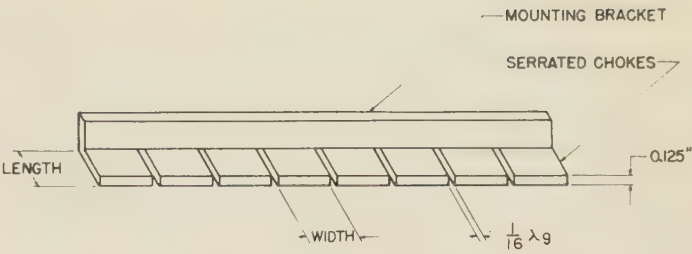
Rectangular cross section choke which was mounted on fixture in Fig. 2.
